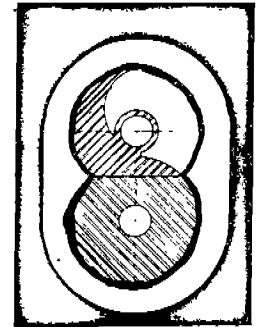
End view of the spiral-axial compressor showing the gas envelope
